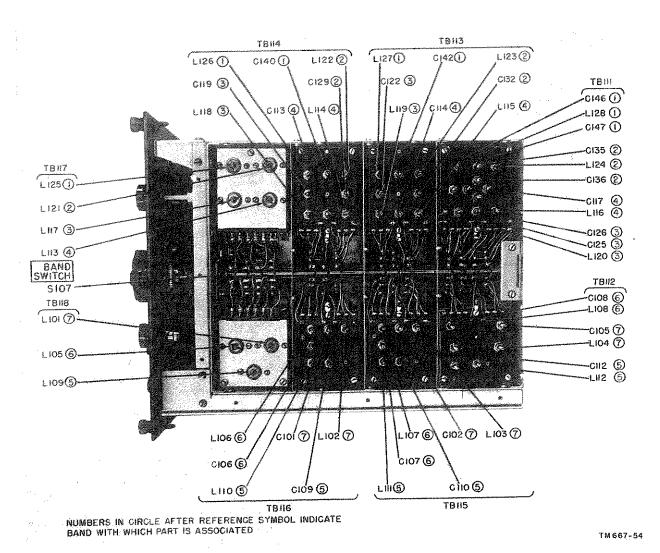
Radio Receiver R-395/PRD-1, right-side view with cover plate removed.
